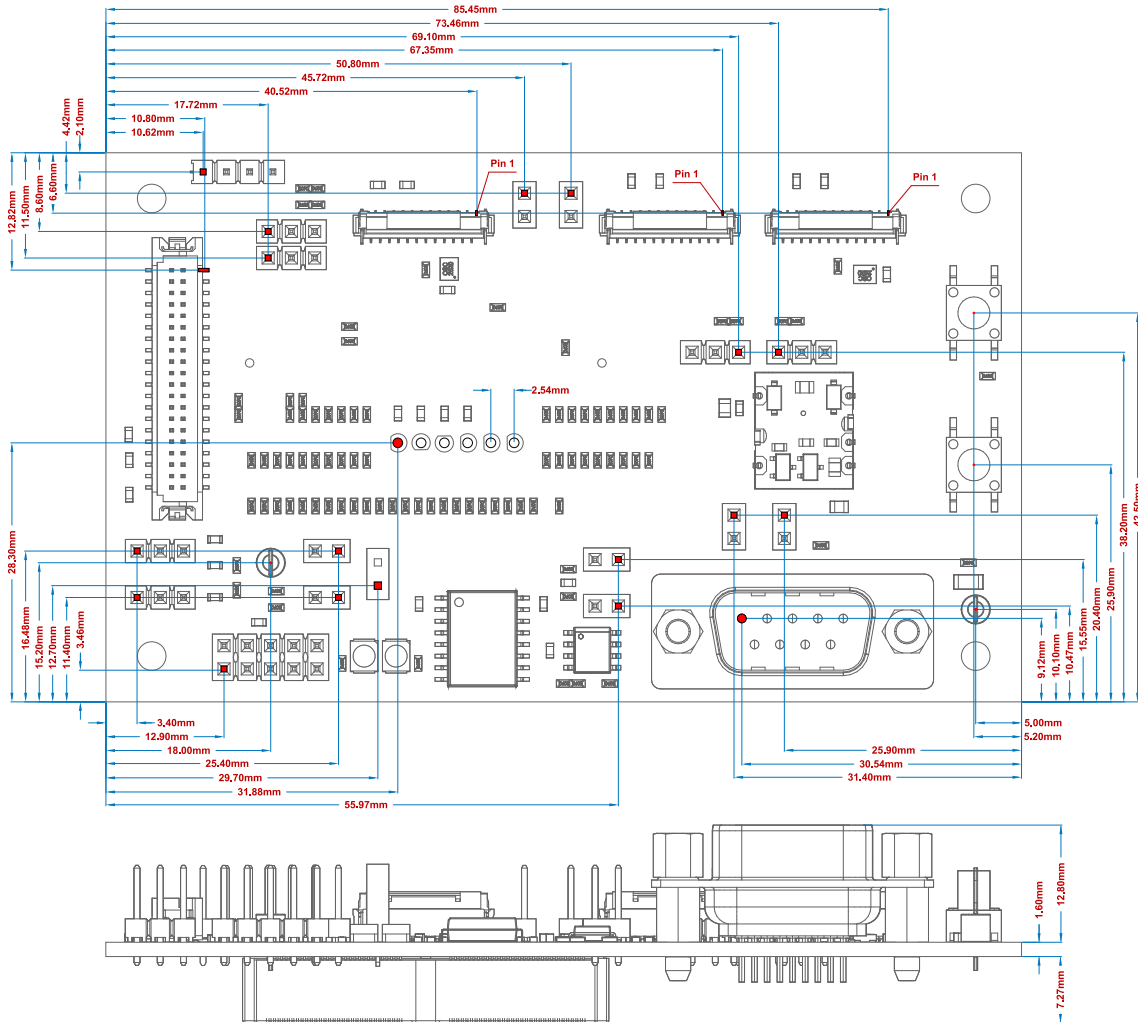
Apalis iMX8 Mezzanine Board Mechanical Drawing – Top Side
